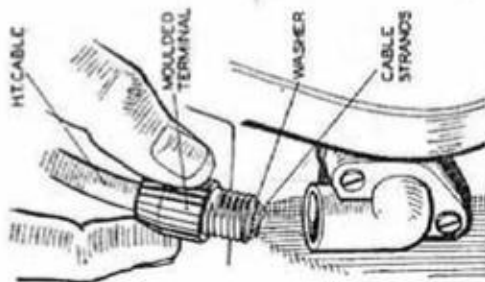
FITTING H.T. CABLE TO MAGNETO PICK-UP
